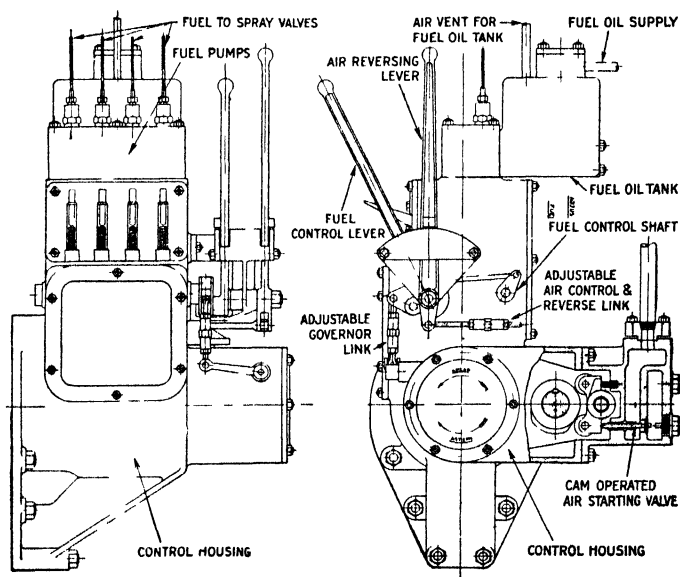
Reversing Gear and Controls, Worthington Marine Engine
